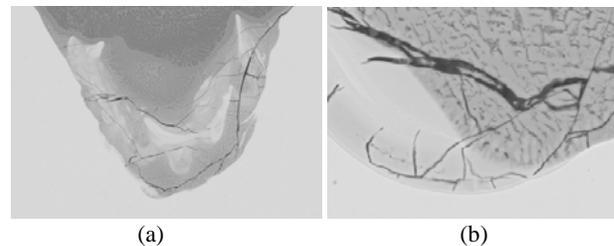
SEM micrographs of the root of weld showing cracks [6]
